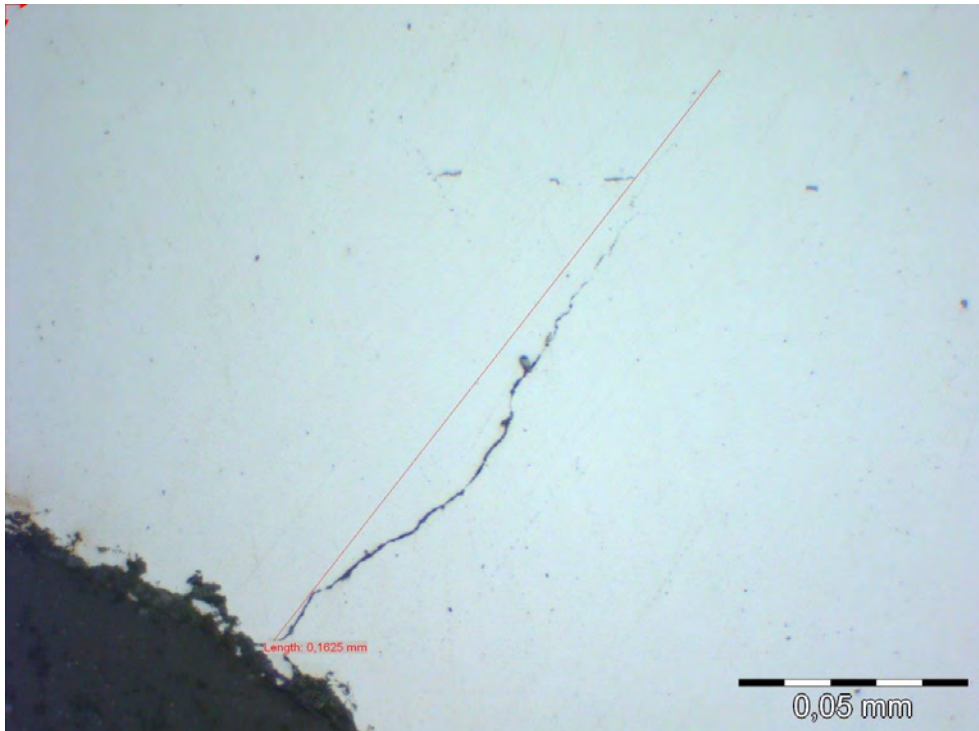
Cut four in crack B at segment B, third ridge on barrel no. SFK 0120-A
